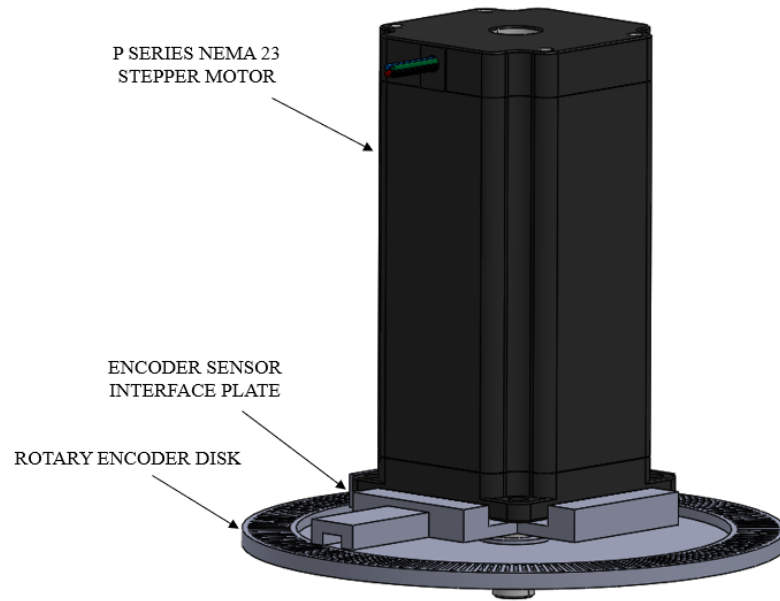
3D model assembly of the 3D-printed optical encoder setup with Nema 23 stepper motor using a press-fit adapter plate with an access port for stepper shaft and slot for optical sensing device [5]
